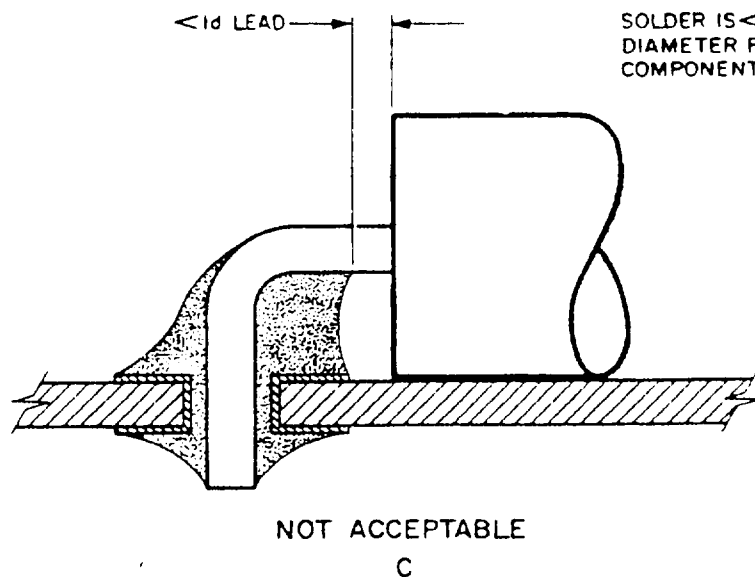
Solder in the lead bend radius (see 5.4.21.16).
